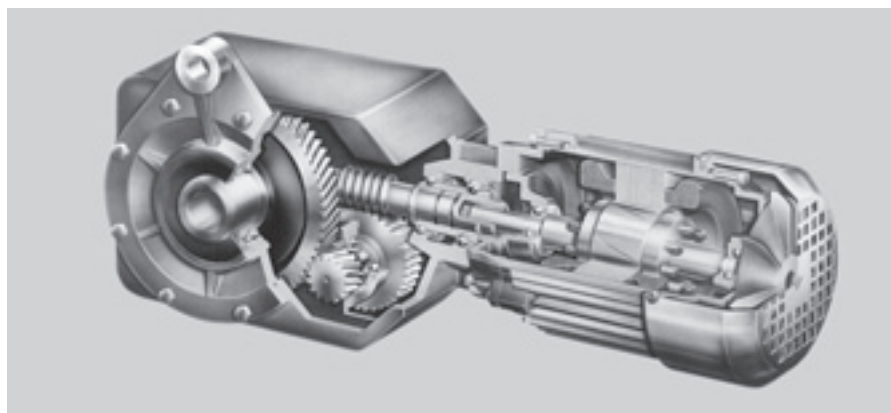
Combined worm and spur gear unit with IEC-Motor, Rhein-Getriebe, Meerbusch, Germany
